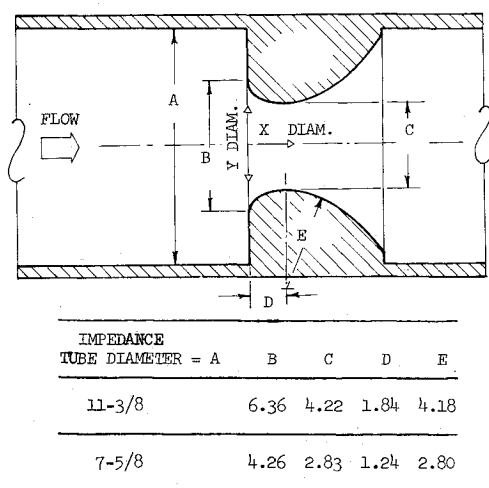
Single-ported solid rocket nozzle. (All dimensions in inches.)
